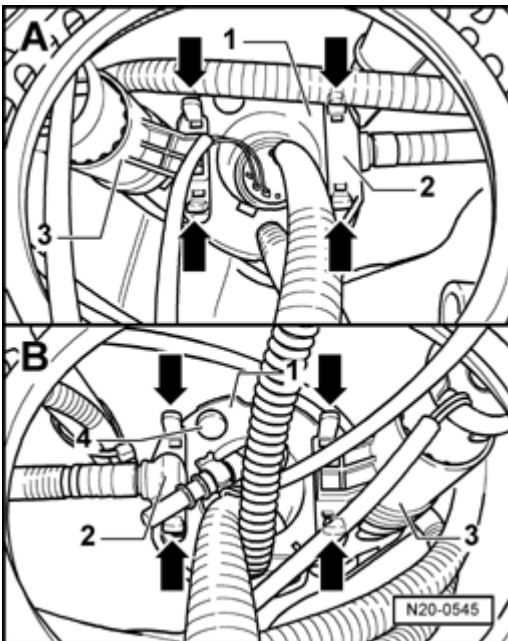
Fuel Delivery Unit, Left Suction Jet Pump, Tubular Sensor And Opening In Housing For Delivery Unit
